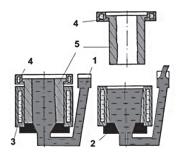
Basic circuit and process of continuous-iterative casting of hollow billets without core; I – metal feeder; 2 – connecting sleeve; 3 – stationary part of crystallizer; 4 – mobile part of crystallizer (pincher); 5 – casting
